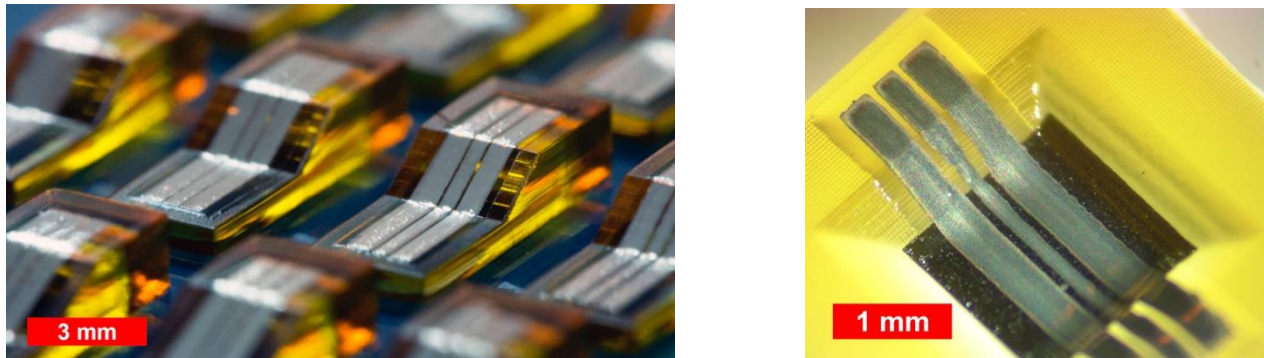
Fully-printed sloped TMV interconnects realized through the combination of inkjet and 3D printing: (a) TMV test vehicle with arbitrarily-sloped interconnects [11], (b) fully-printed TMV-integrated partial IC encapsulant [10].
